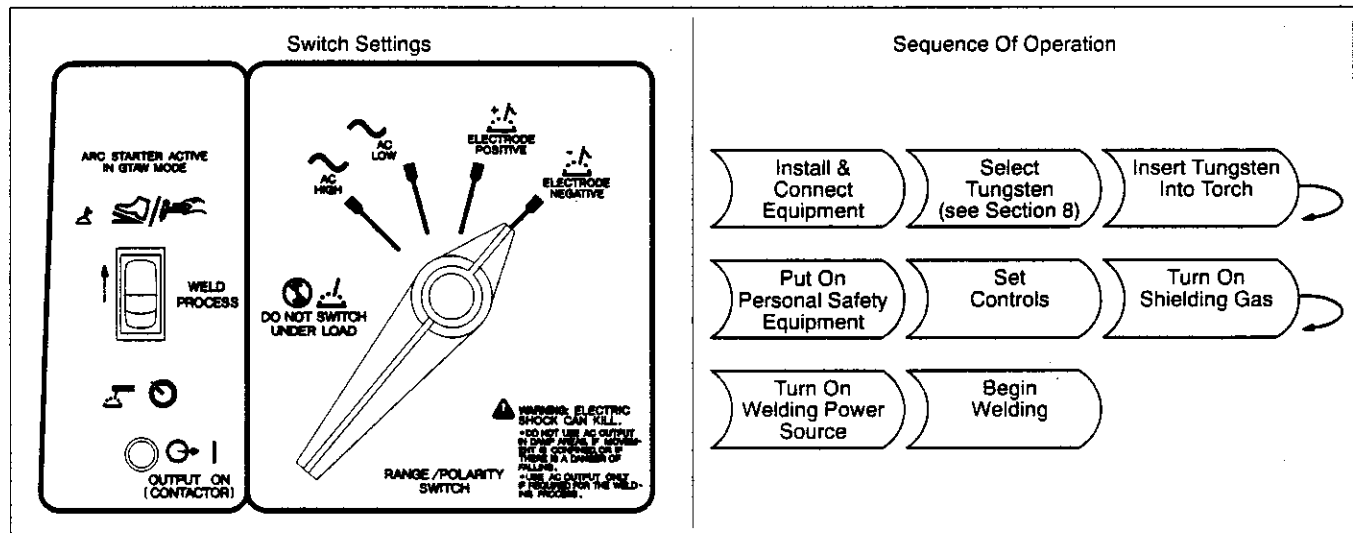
Gas Tungsten Arc Welding (GTAW) Of Steel And Stainless Steel
